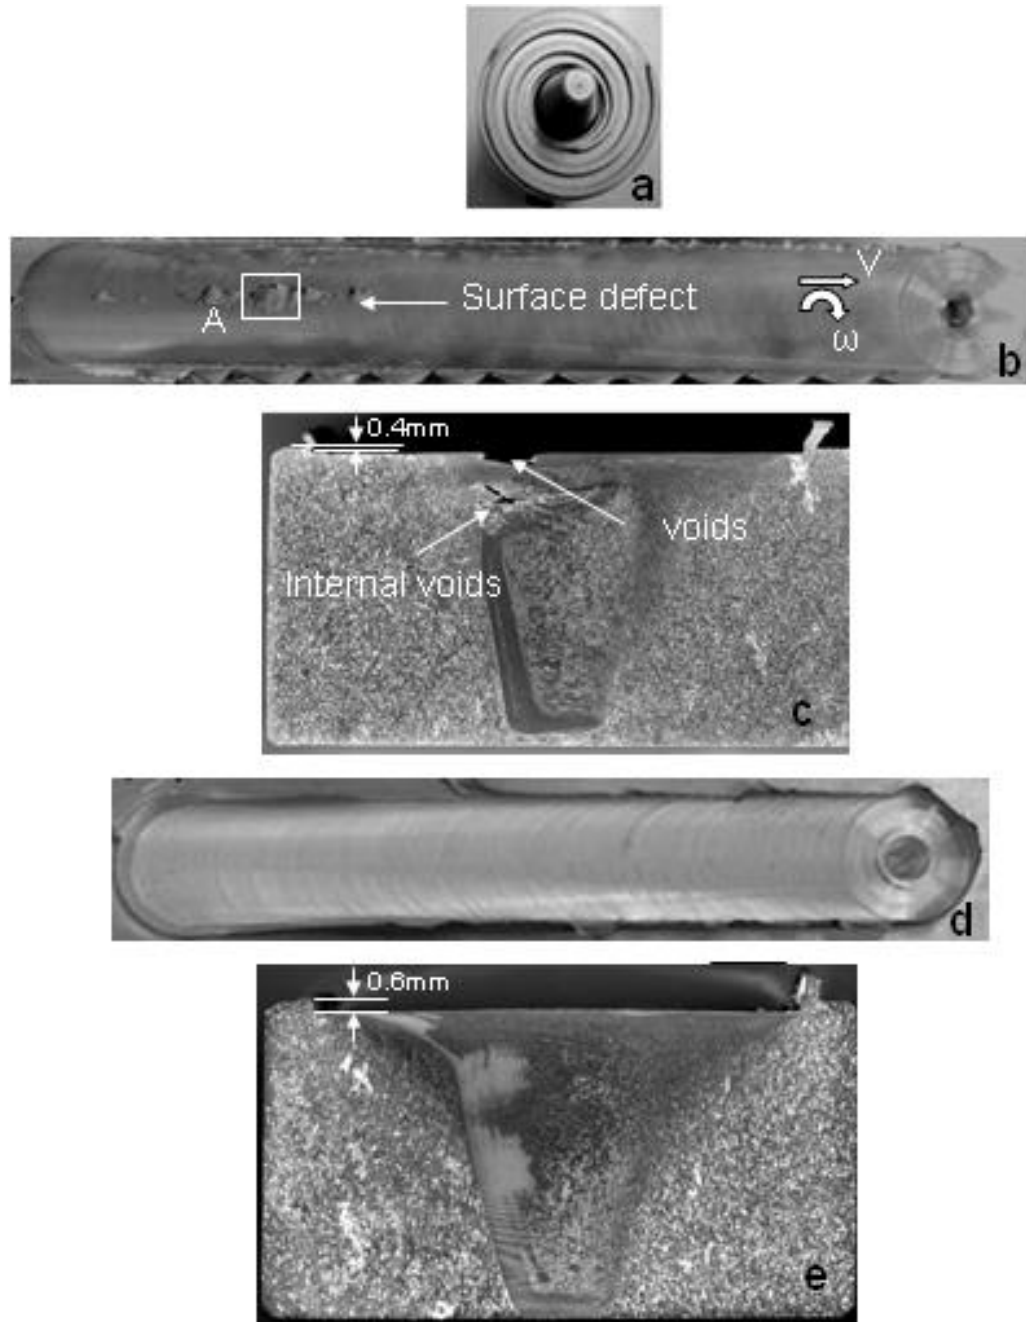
Transverse section of 25.4mm thick 5083-H131 Al FSW weld showing typical weld end defect, using scroll shoulder and three flats on thread tapered pin tool rotating at 250rpm and travelling at 107mm/min [15]
